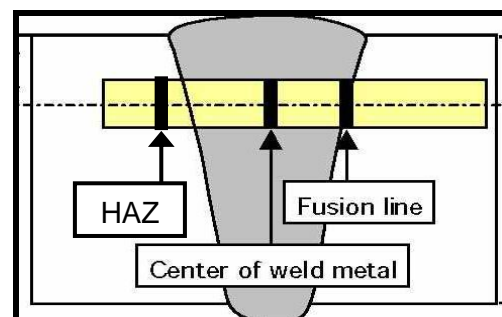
Schematic location of notch in a butt-weld assembly.
